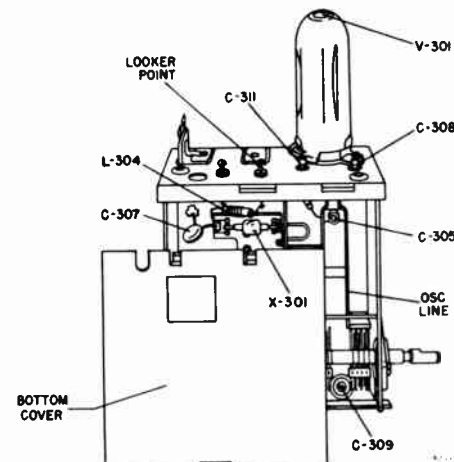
B. Parts Identification of 1E1855 UHF Tuner
